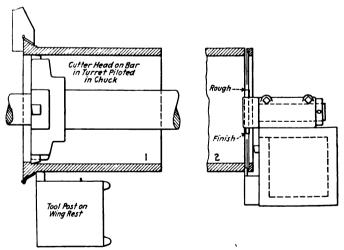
Tooling Set-Up for Piston Valve Packing Rings
